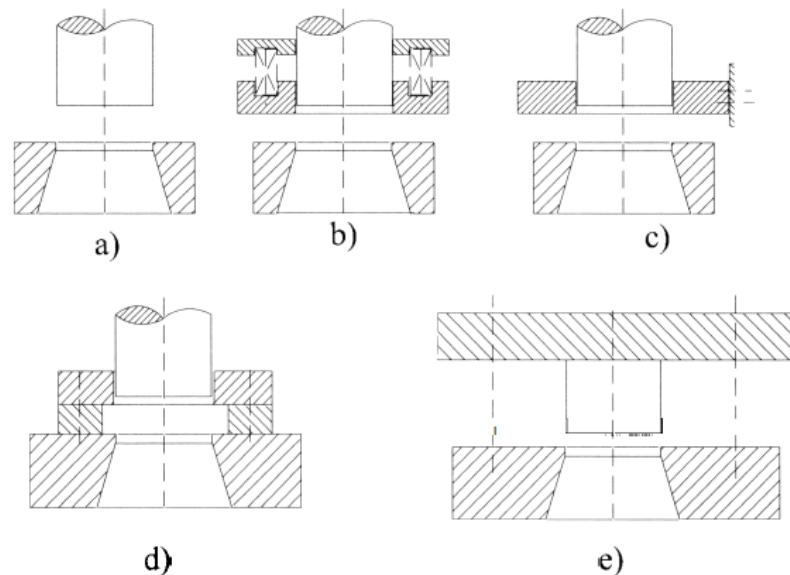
Schematic representation of die classifications using the upper and lower die sets' reference techniques: a) plain dies, b) simple dies with a retractable piece of elastic, c) simple dies with a strong stripper, d) mid guide plate for dies, e) with guiding posts dies [28].
